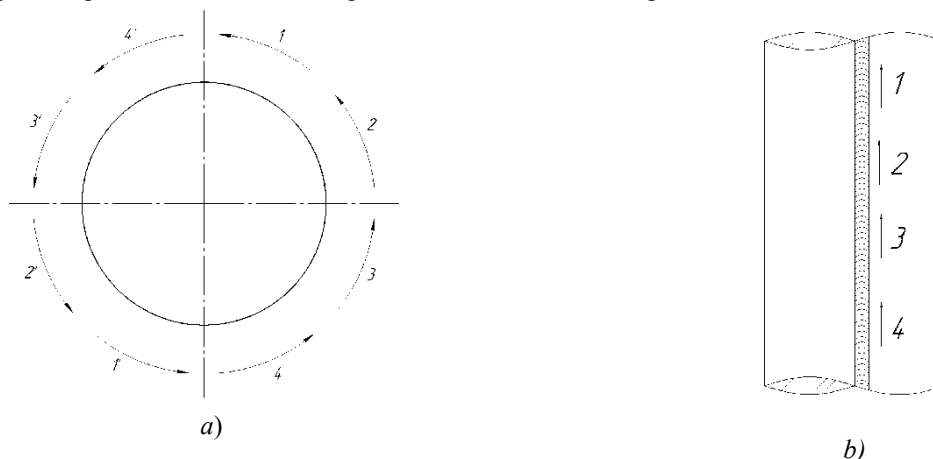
Diagram of implementation of: circular welds (a), longitudinal welds (b)
